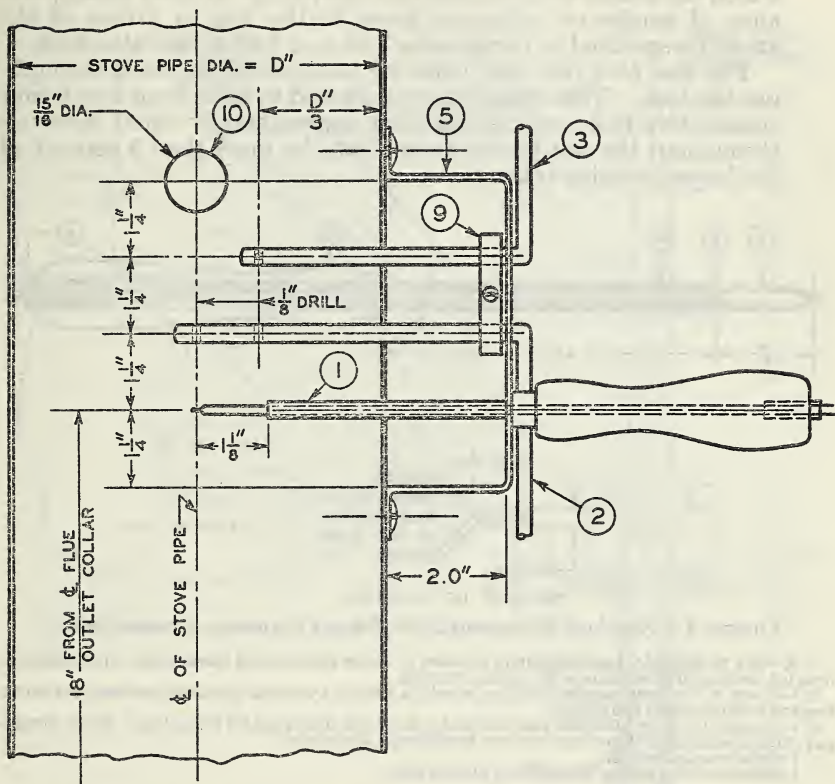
Gas-sampling and draft tubes, thermocouple and support bracket assembly.
